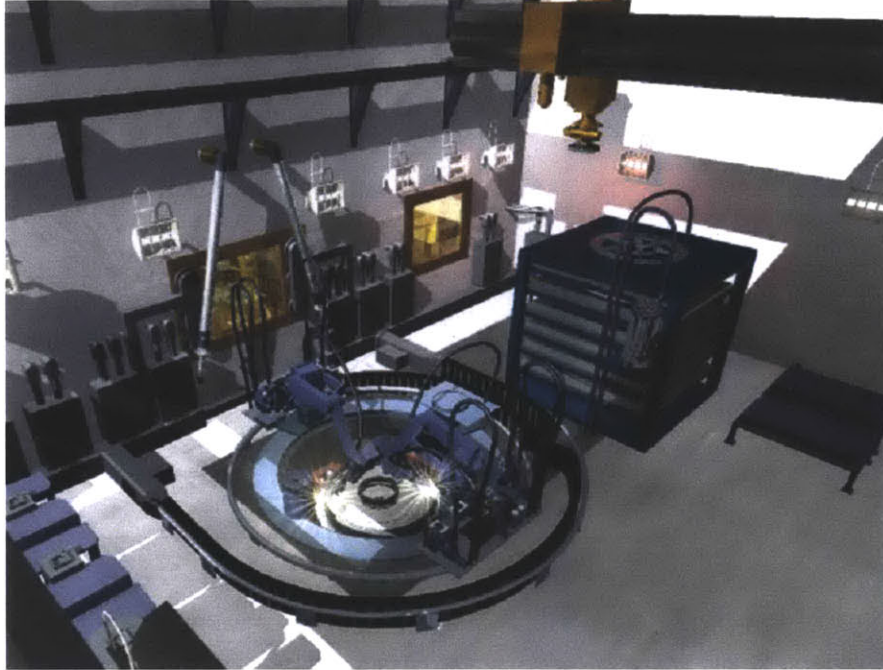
An illustration of the Yucca Mountain waste package closure system, robotically welding a waste package lid in place [41]
